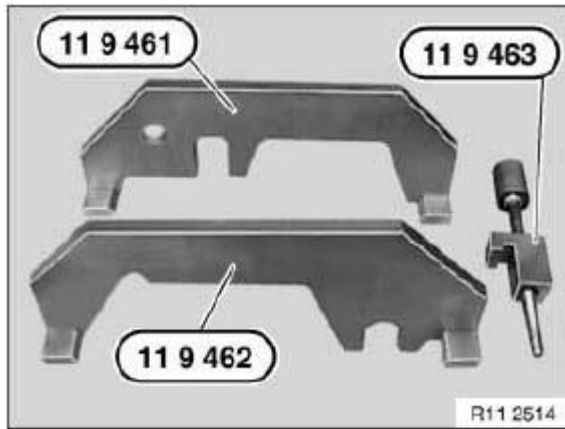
Identifying Special Tool (11 9 461), (11 9 463) And (11 9 462)
